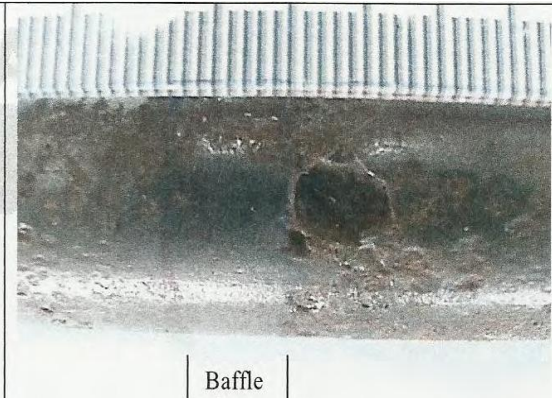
E-105 with trough wall pitting 5mm x 6mm located next to baffle plate and tubing intersection. Smaller size pits observed in adjacent area. [6]
